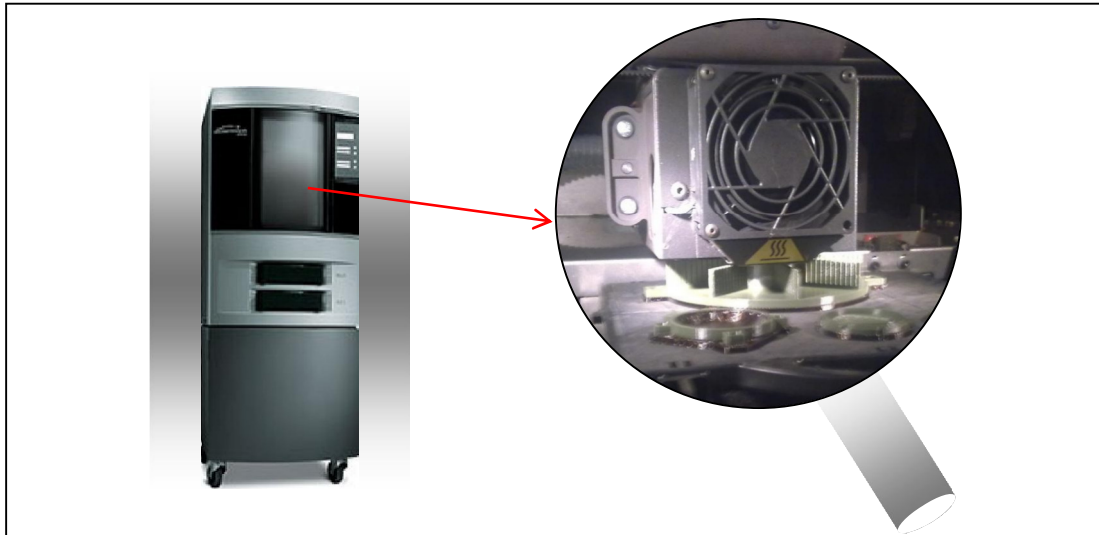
Dimension Elite 3D Printer during base fabrication process.
